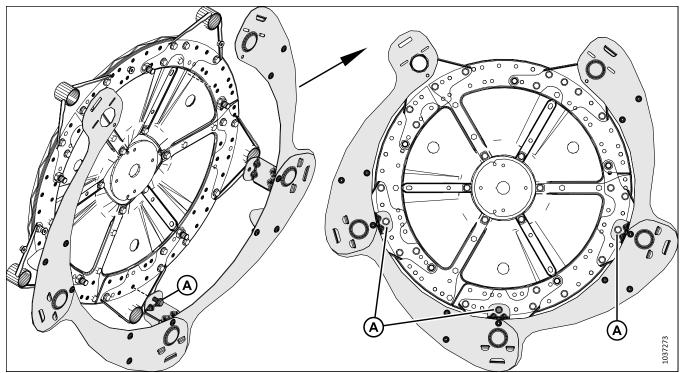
Five-Bat Reel – Partially Assembled Reel Endshields on Reel
